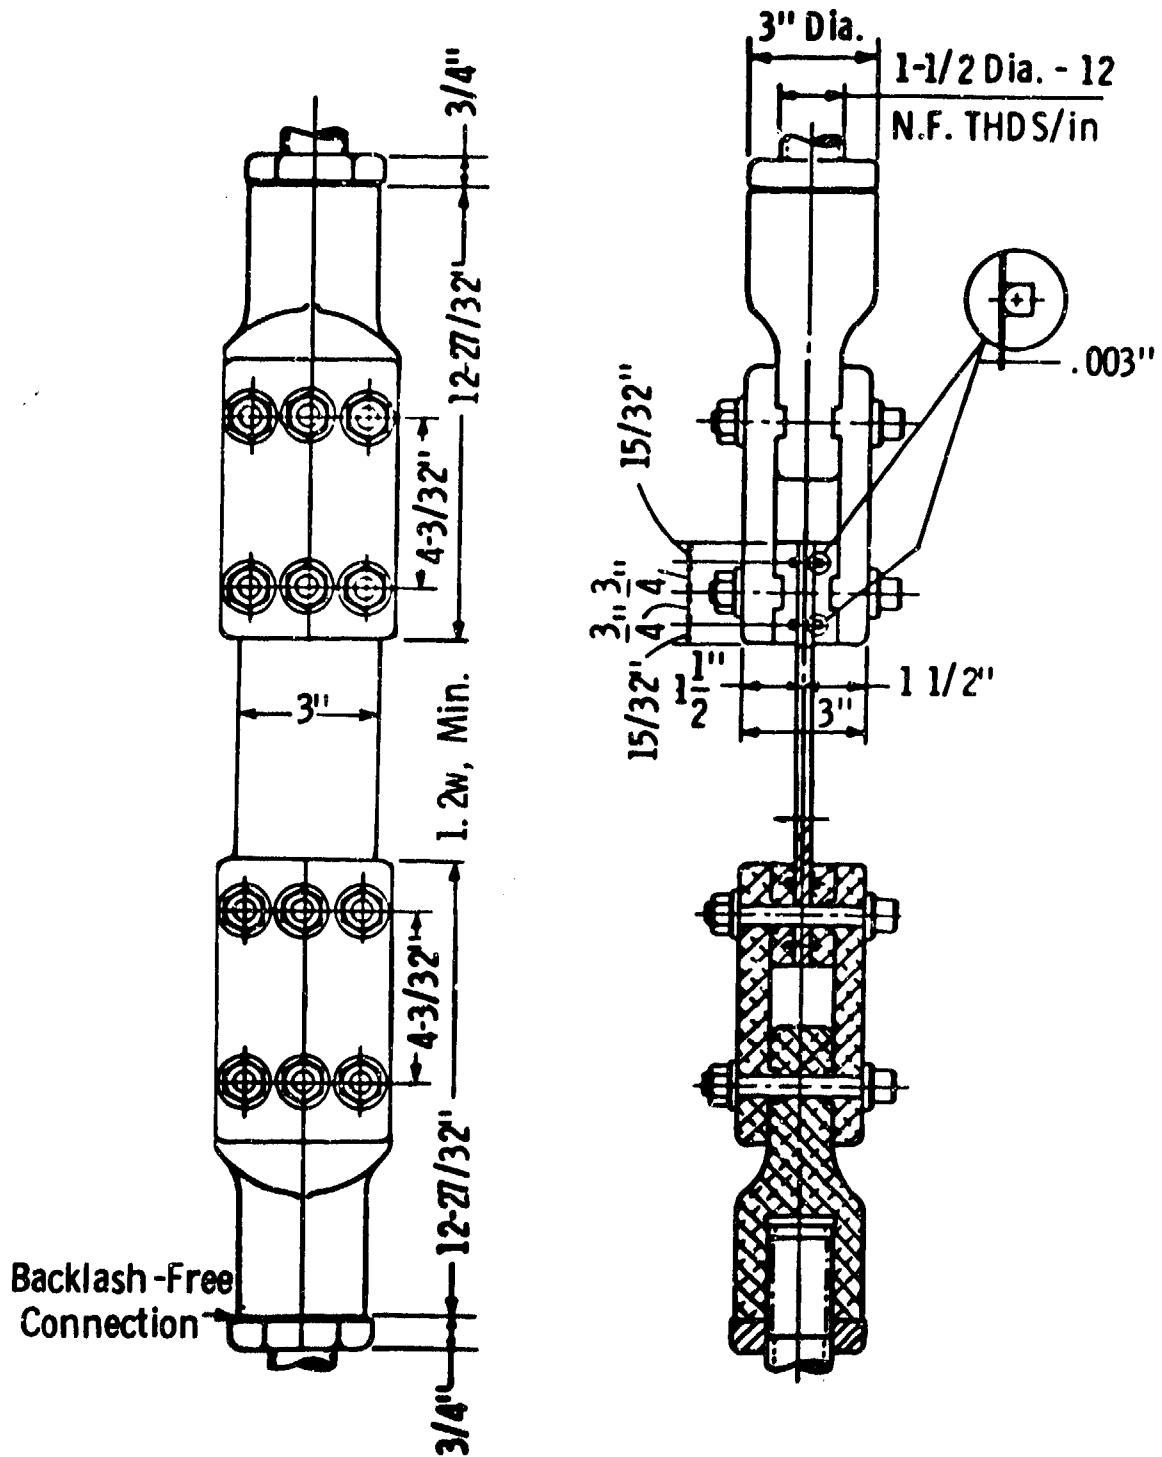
Bolt and keyway assembly for gripping short CCT specimen
